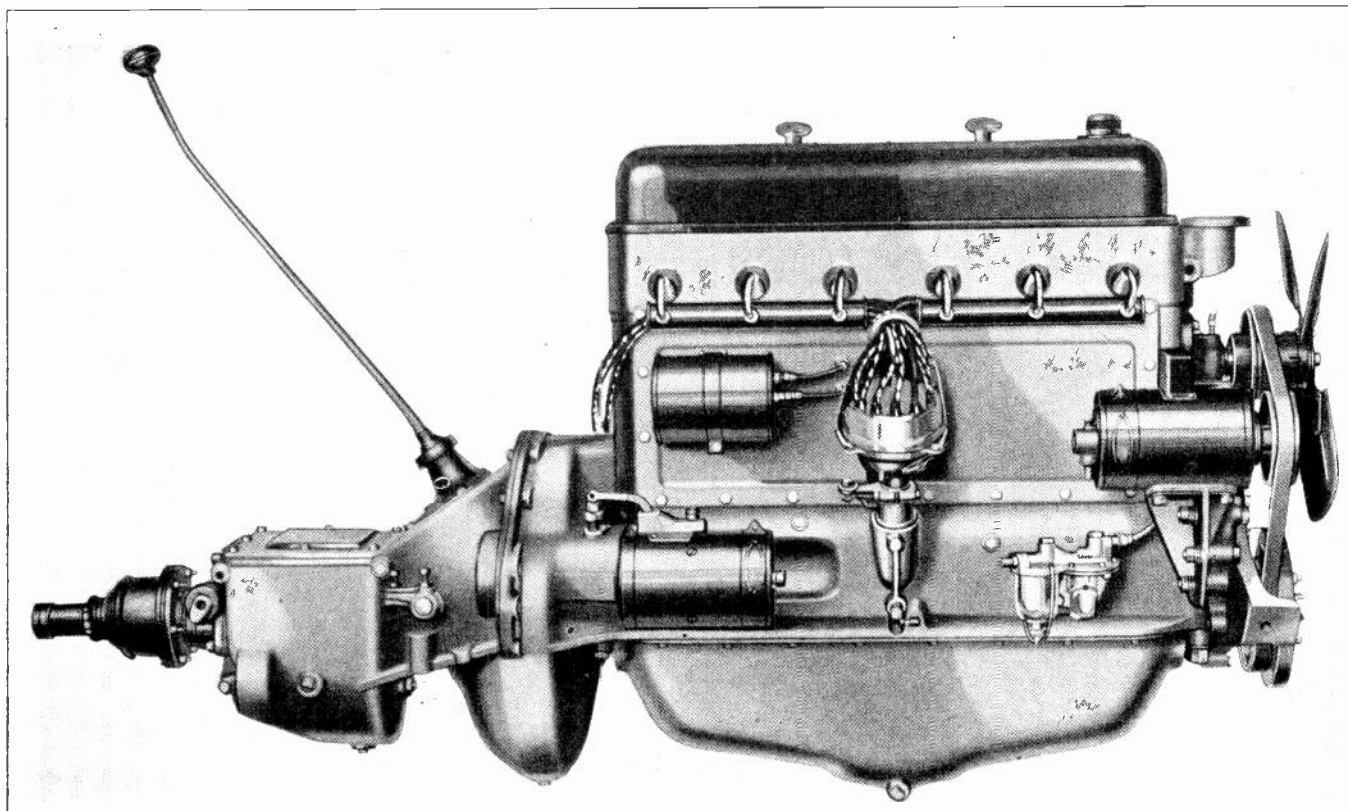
Side view of a six-cylinder Nash engine showing the location of the starting motor, generator, double ignition distributor, and fuel pump. Note the generator driving belt which drives both the generator and fan.
